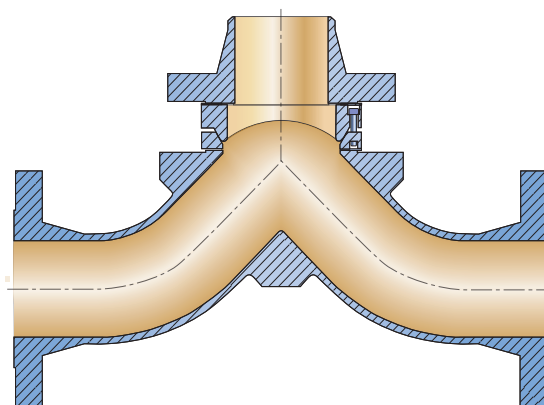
This viscous-tee holder design continually wipes the disc surface, preventing product buildup
